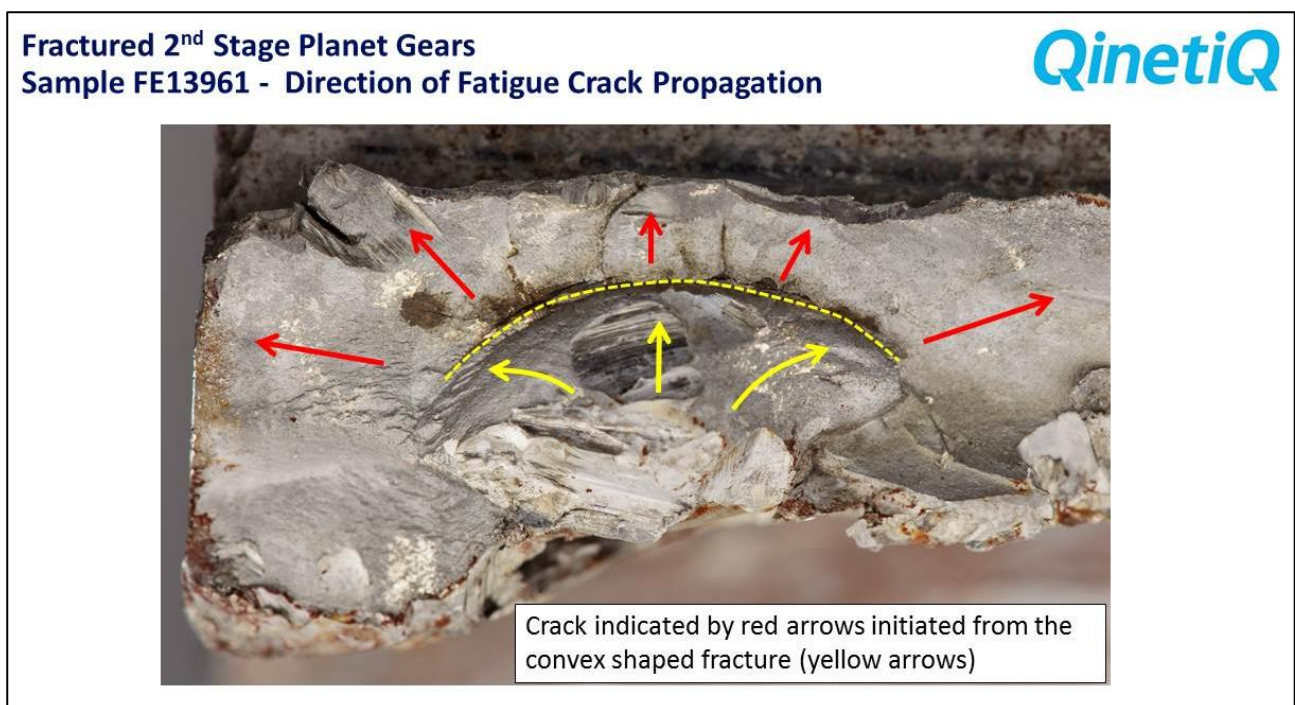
Close-up of the fracture surface initiated on the inner surface (outer race). Multiple cracks propagating from major crack around convex fracture surface. Photo: QinetiQ
